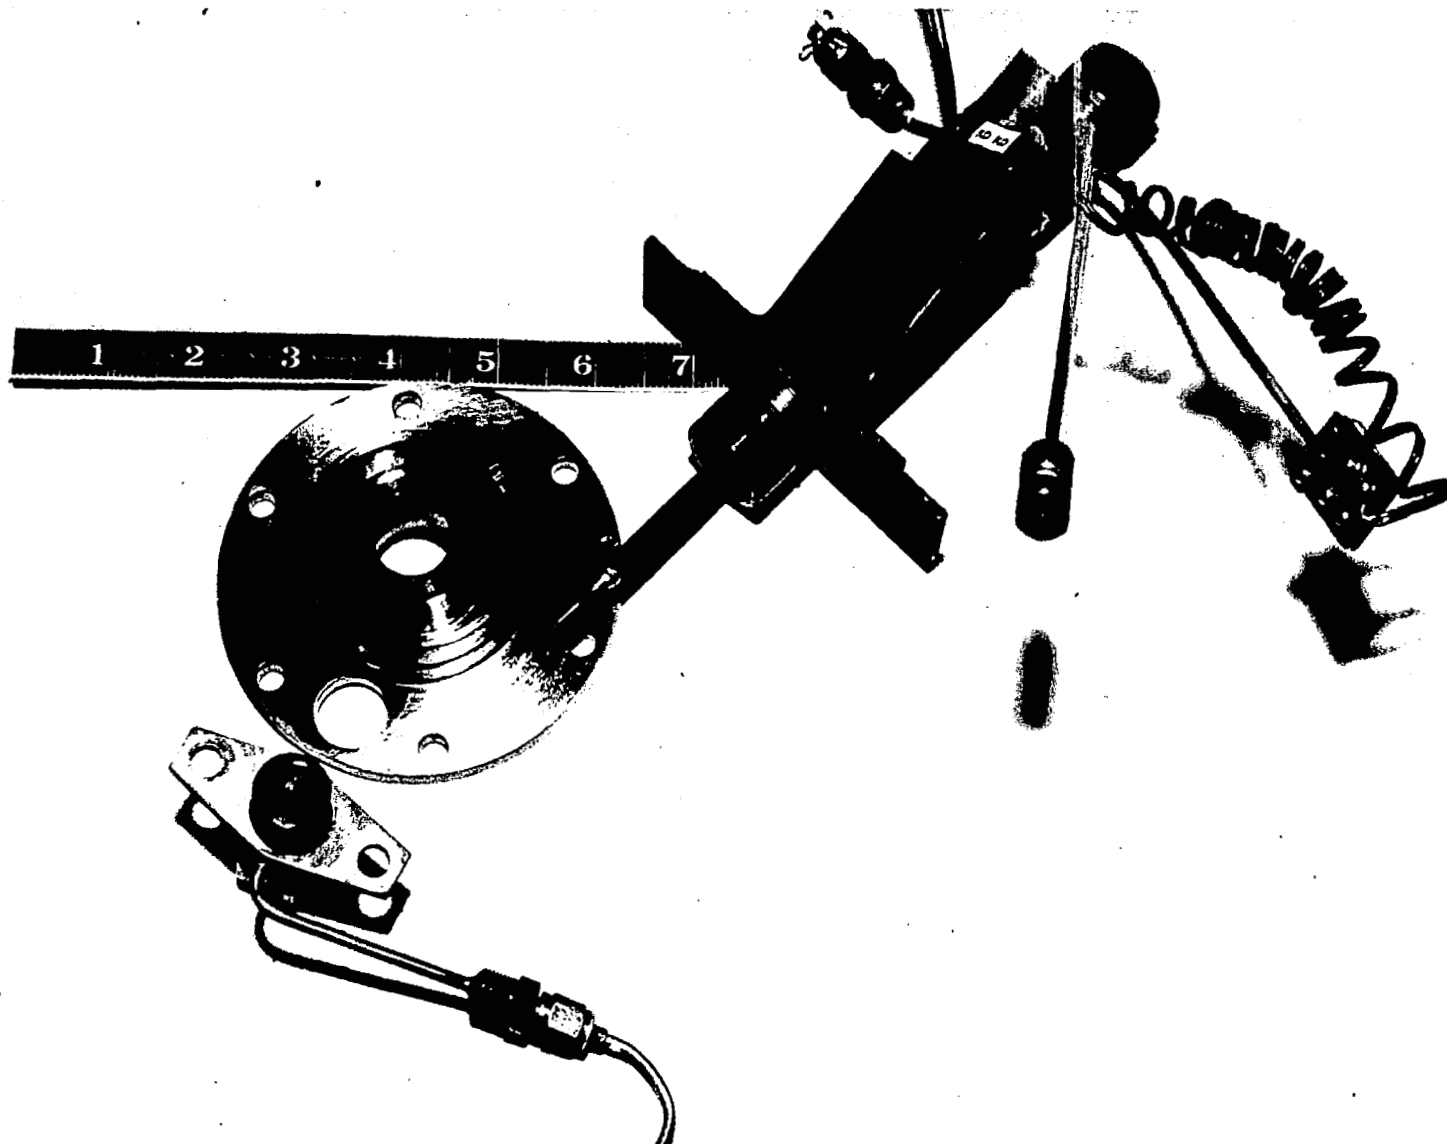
Oil and Gas Inlets for Turbine-Compressor Bearing after 500 Hours of Test CN-8894
